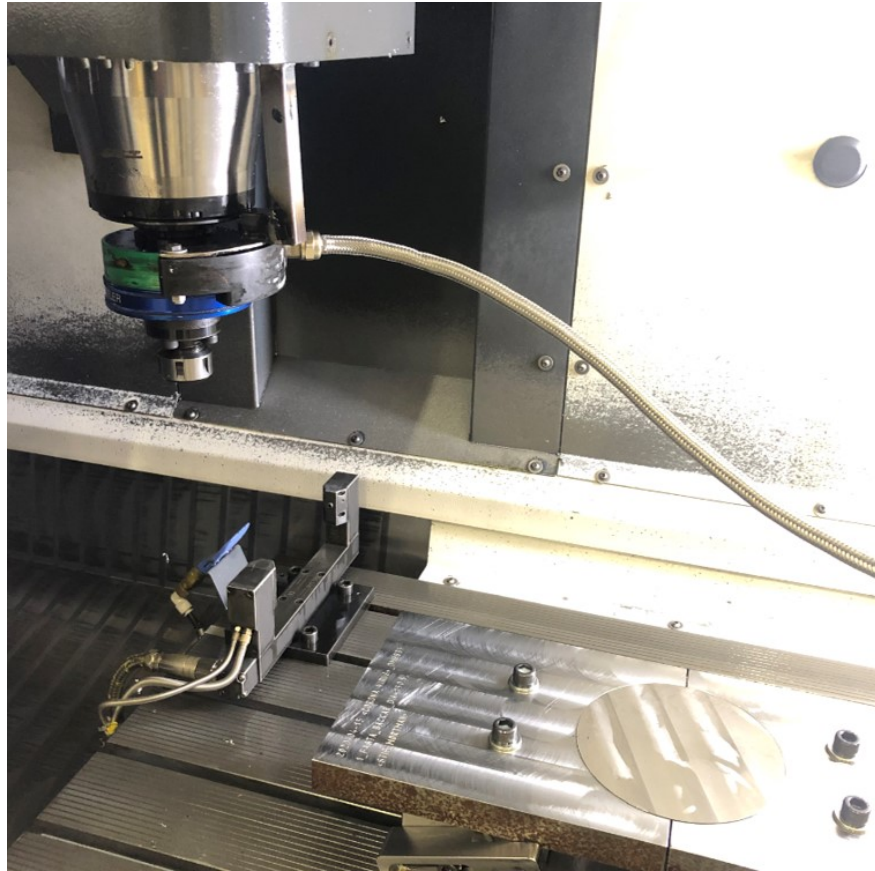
The Kistler rotating dynamometer and workpiece clamping setup in the DMG DMC 835 V.
